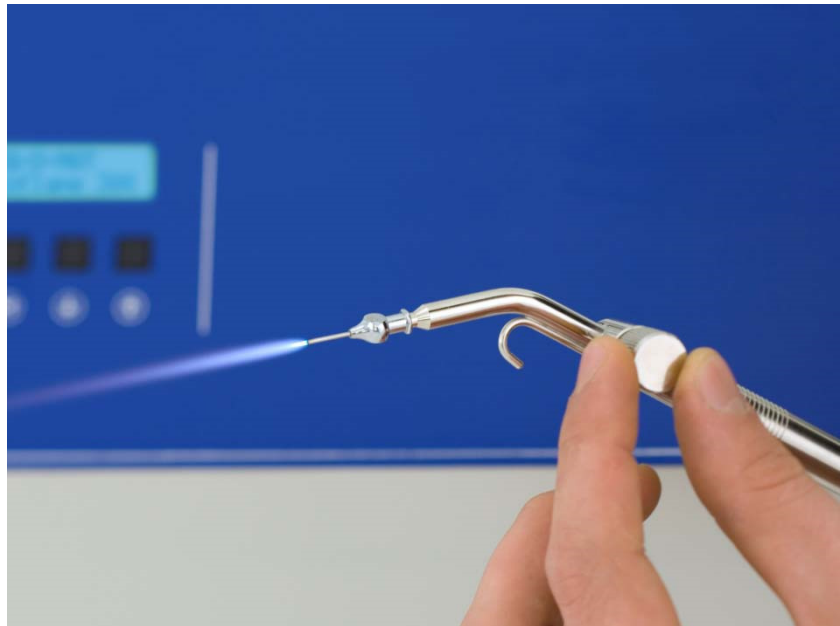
Regulation of the flame size at the burner hand piece valve
